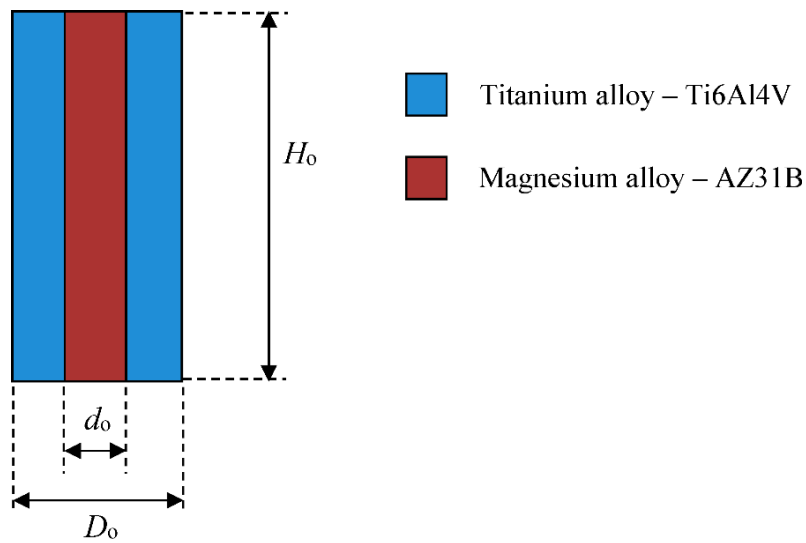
Bimetallic cylinder sketch and initial geometrical dimensions.
